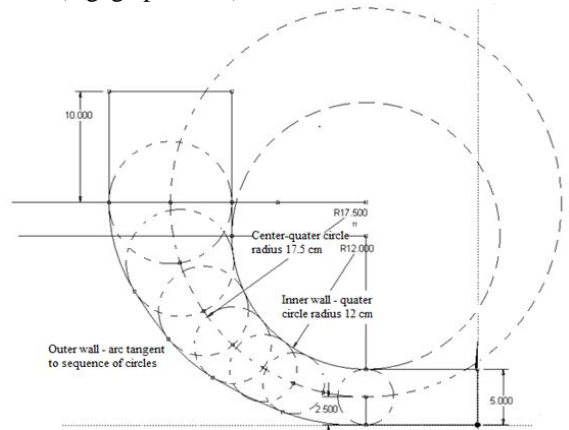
Construction lines, i.e. dashed line of a 90° turning diffuser (all dimensions in centimeters)
